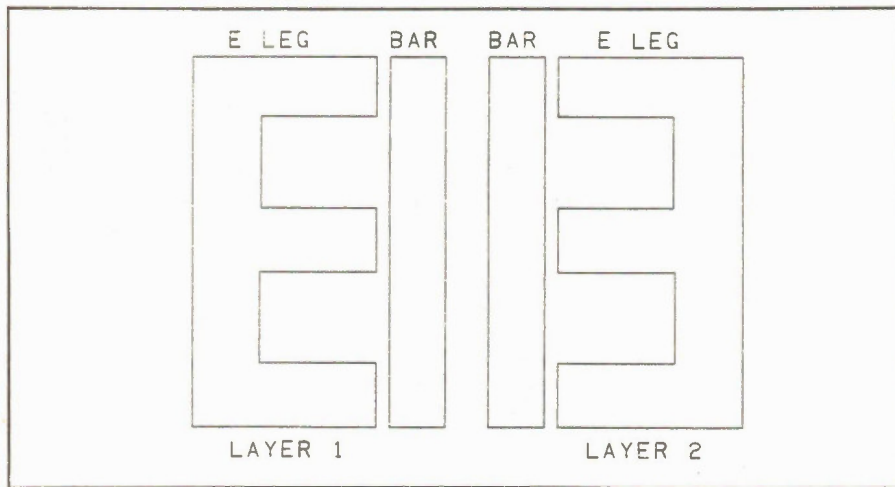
Showing how, in the transformer, the E leg and bar sections alternate in position. The E leg and bar are fitted together very tightly.
